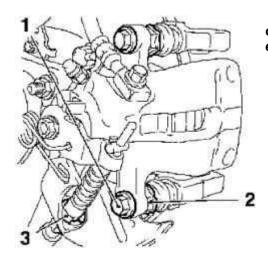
Removing the brake disk: 1 - rotor, 2 - guide pin, 3 - emphasis
